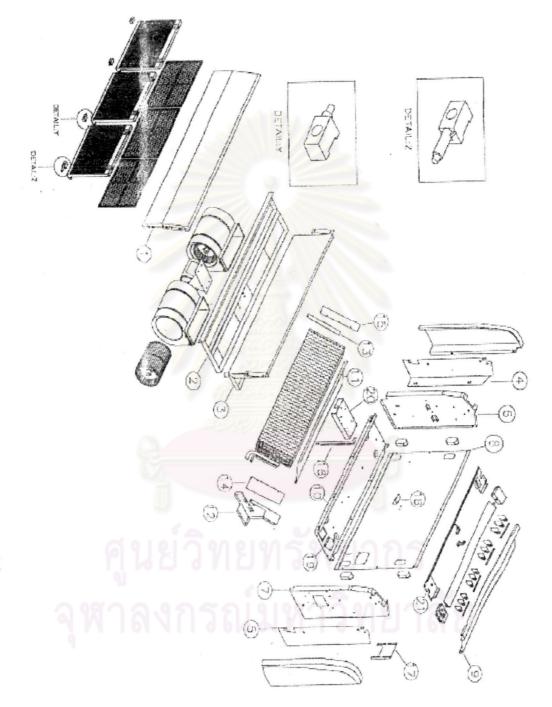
; Design parts of fan coil unit of SFJ-12 model
